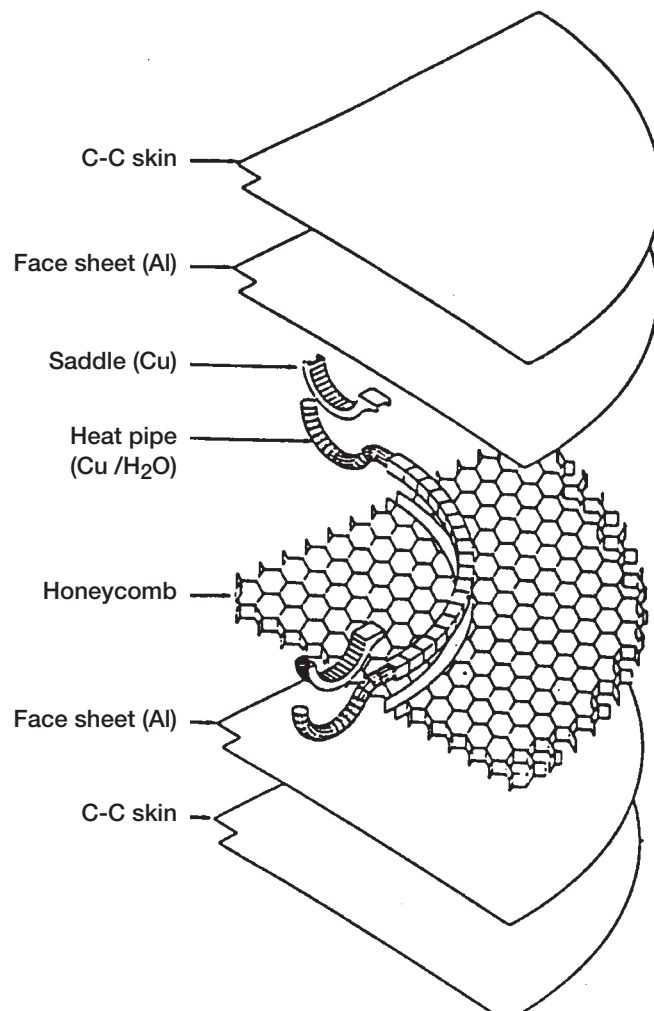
Exploded view of radiator quadrant used in Orbital Sciences Corporation system concept (ref. 2).
